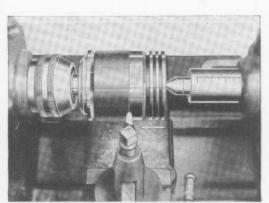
Finish Turning a Semi-Machined Piston, Feeding the Lathe Tool from Right to Left
